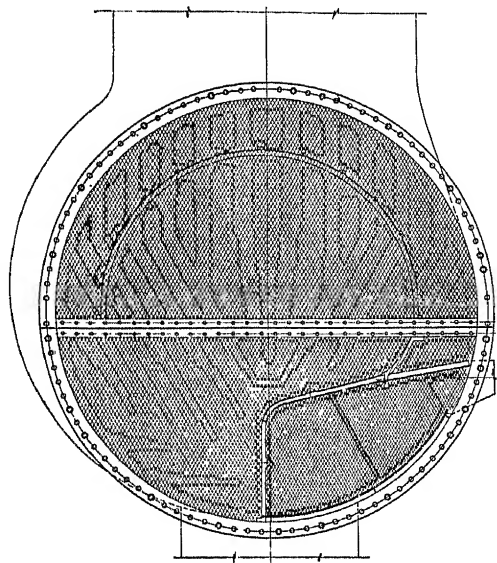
INLET END TUBE SHEET LAYOUT FOR 30,000 SQ. FT. CONDENSER. (NOTE QUESTION MARK Baffle FOR GUIDING WATER FROM AIR COOLER TUBE SURFACE TO OUTSIDE RING OF TUBES IN SECOND PASS)
